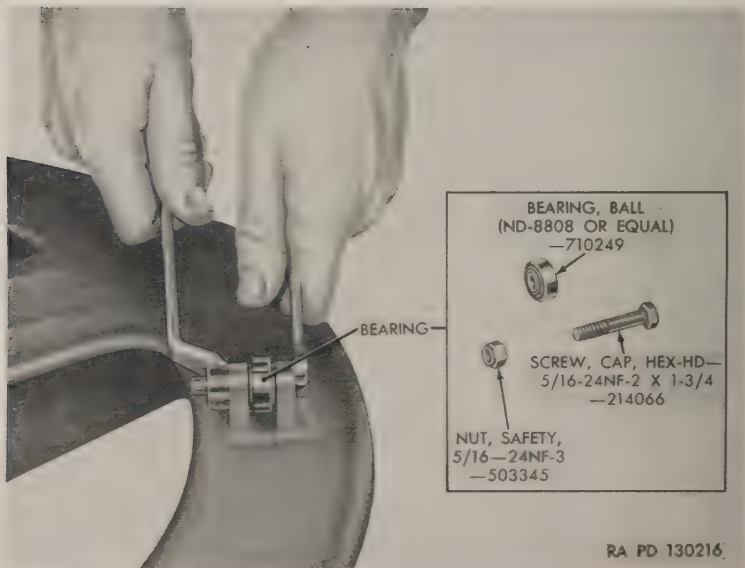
Removing ball bearing from support—plotting boards M5 and M5A2.
